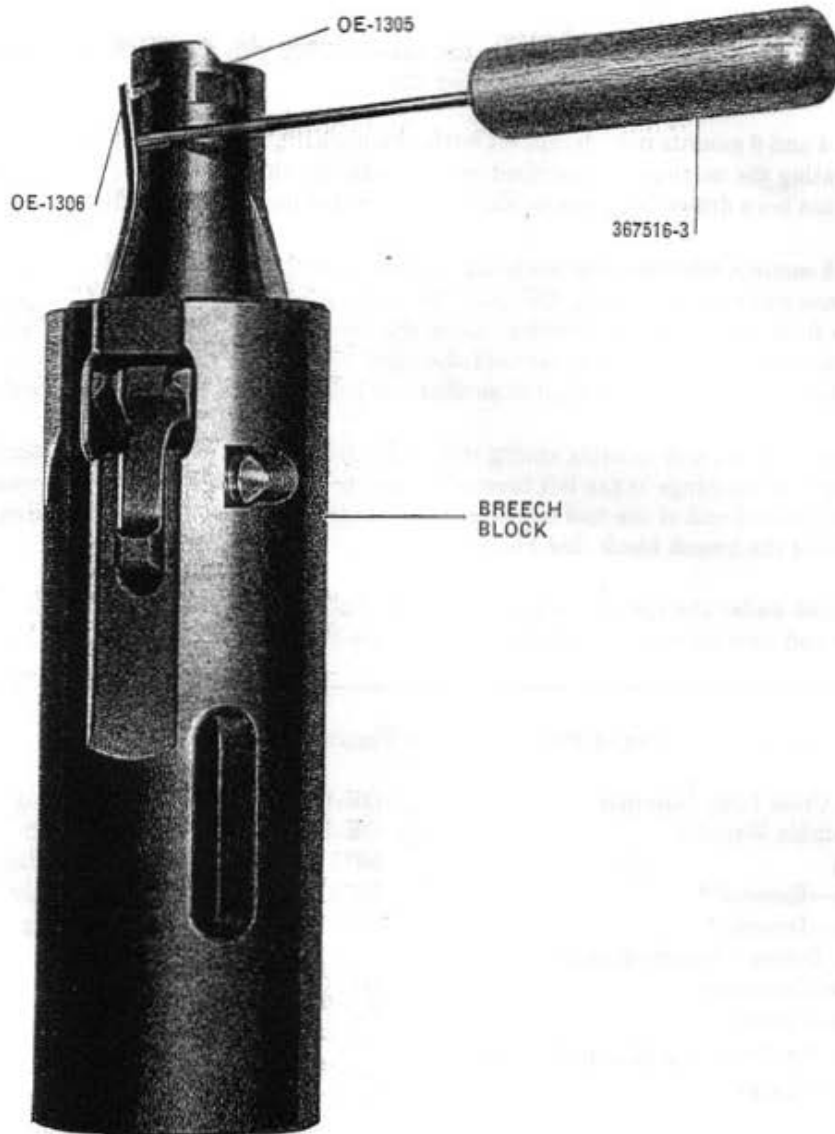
Tool (367516-3) inserted between breech block and securing spring
